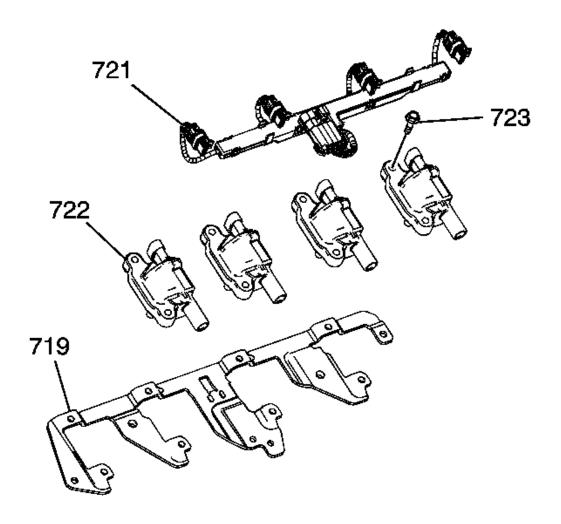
View Of Bracket, Bolts, Coils & Wire Harness Courtesy of GENERAL MOTORS CORP.
